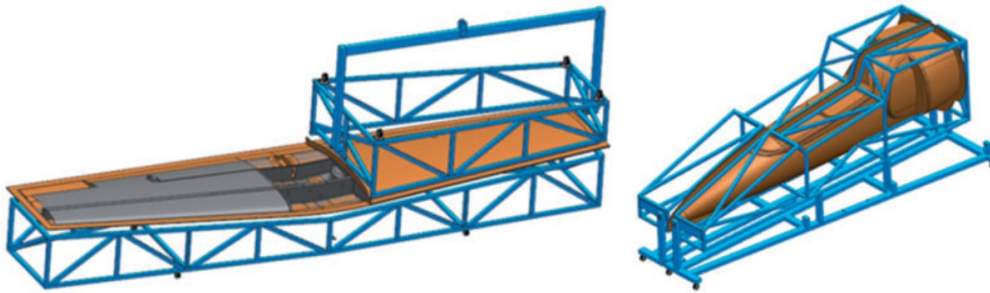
UL-39 wing and fuselage manufacturing mould [17]
